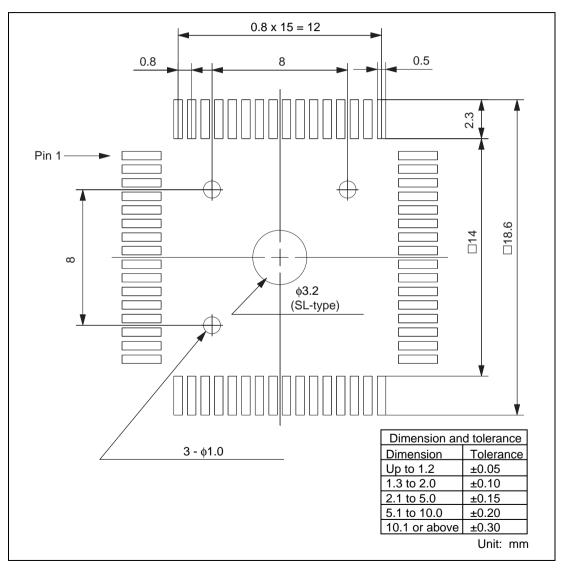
Recommended Dimensions for Mount Pad for PRQP0064GB-A (Former Code: FP-64A)
